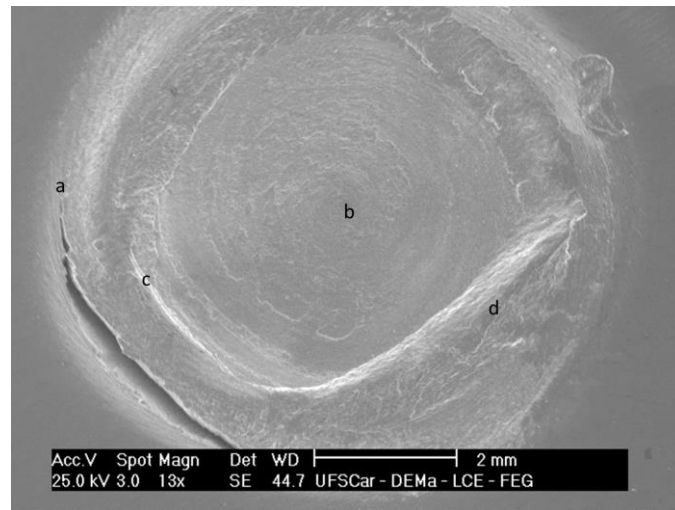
Fatigue fracture surface of flat hook specimen obtained in low-cycle load conditions.
